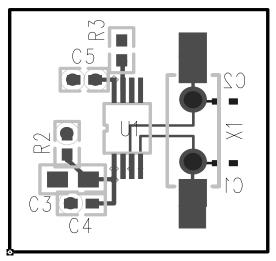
B. ICS840021 PC BOARD LAYOUT EXAMPLE
